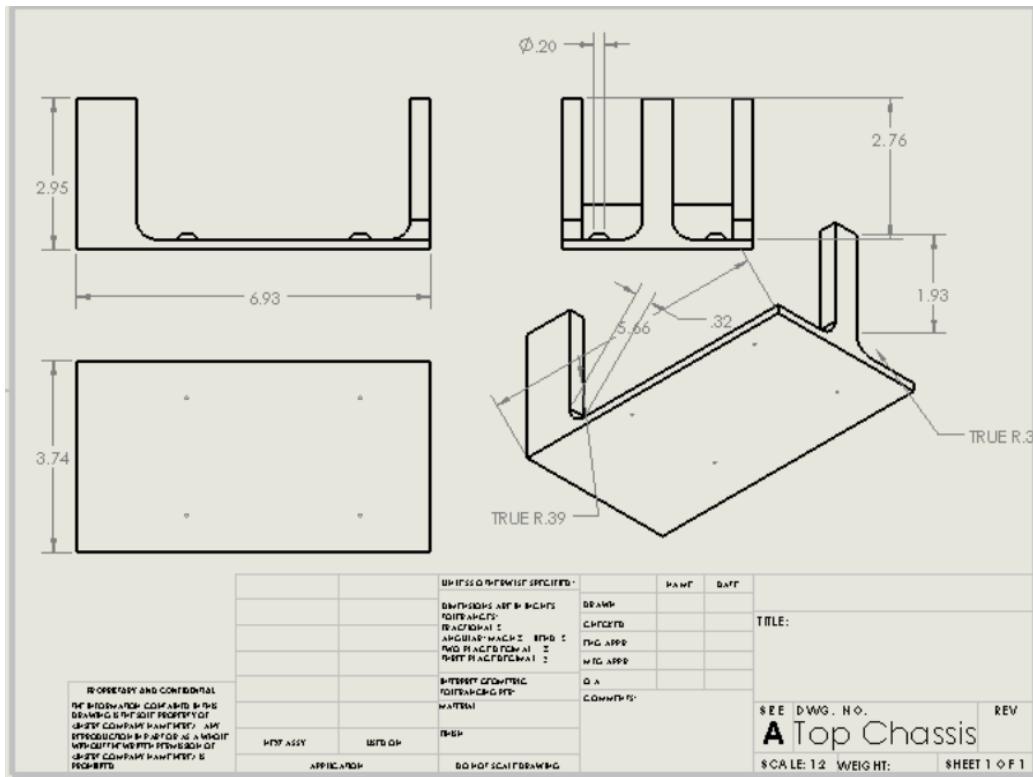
Engineering Drawing of Top Chassis (in.)
